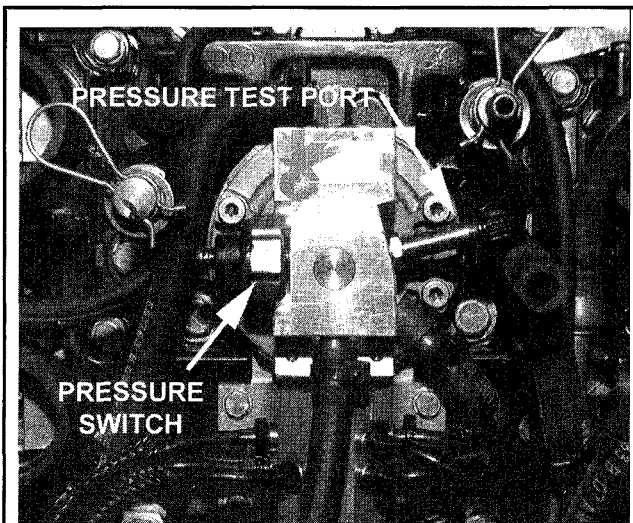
FFI models equipped with hard fuel rails utilize a pump with both a pressure switch and pressure test port
